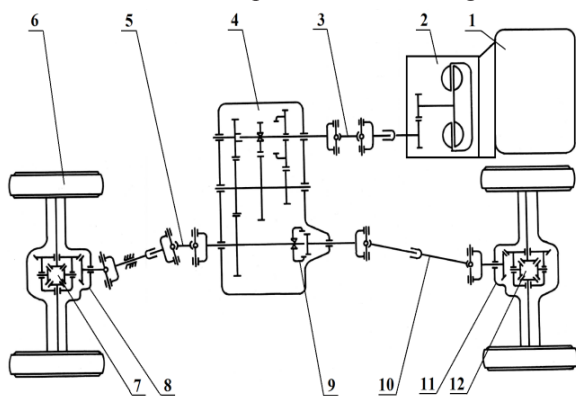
Power drive design of the articulated forklift family with two drive axles, where: 1. Internal combustion engine (ICE); 2. Hydrodynamic gearbox; 3. Cardan coupling; 4. Two-stage distribution gearbox; 5. Cardan coupling with intermediate bearing; 6. Wheel drive; 7. Differential of front drive axle; 8. Front drive axle; 9. Coupling for enabling/disabling of the rear drive axle; 10. Cardan coupling; 11. Rear drive axle; 12. Differential of the rear drive axle.
